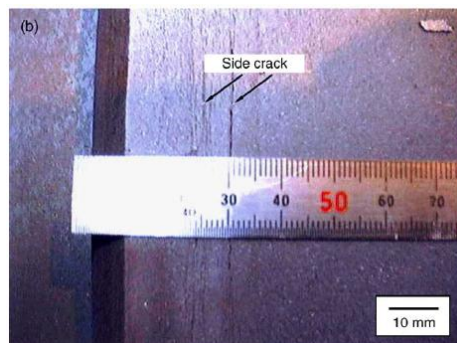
A photograph showing typical side cracks formed on the strip surface [32]
